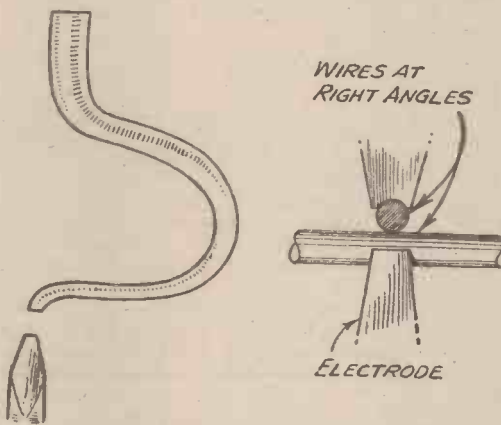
(left) Swan-neck electrodes. Fig. 7.—Position of electrodes for wire welding.
